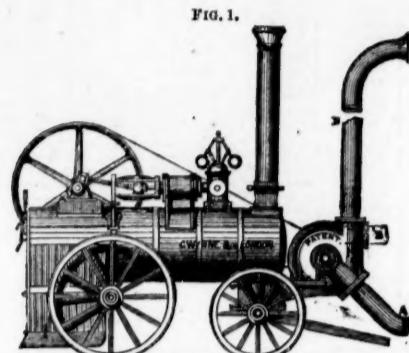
PATENT PORTABLE PUMPING ENGINE, WITH PUMP FIXED TO ENGINE; made in all sizes.
